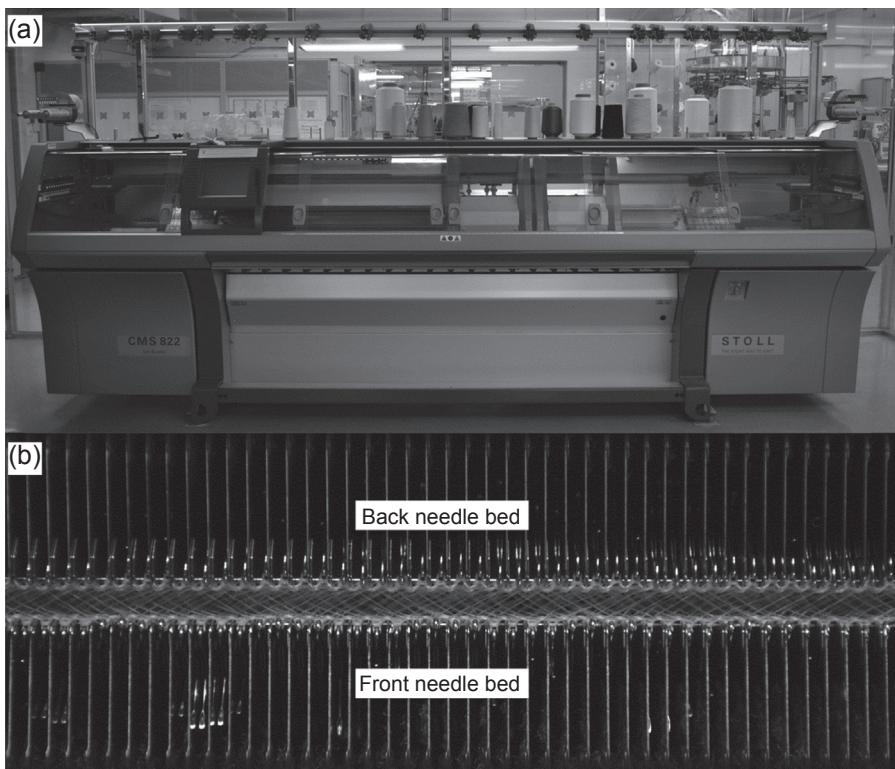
Producing a spacer fabric on a computerized flat knitting machine: (a) a Stoll computerized flat knitting machine; (b) knitting a spacer fabric on the flat machine.
